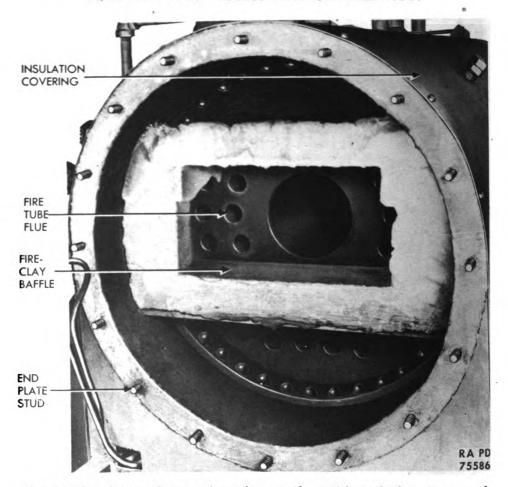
Steam Generating Plant Boiler With End Plate Removed
